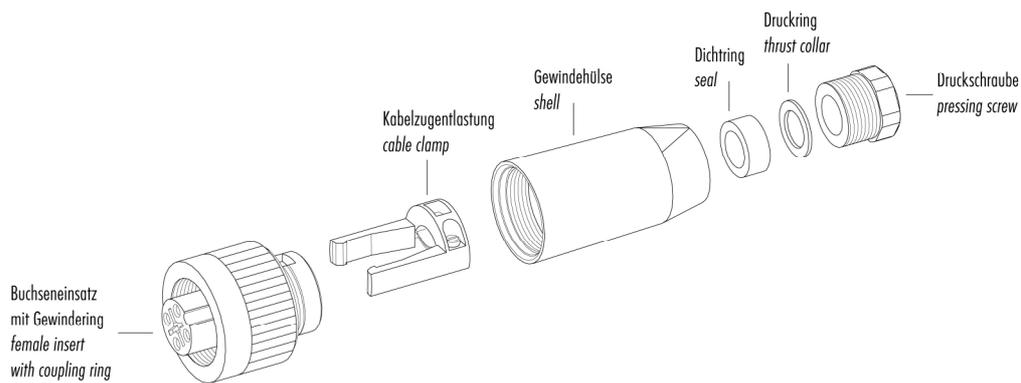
Installation instructions for plug connector of connection 3 (230V AC)
